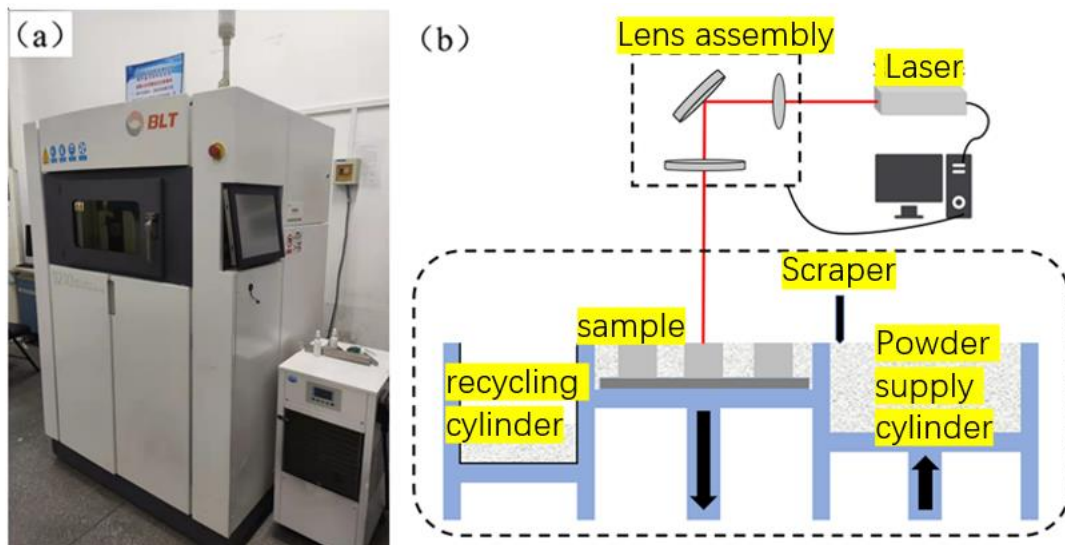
Experimental equipment: (a) Forming equipment diagram; (b) Forming schematics.
